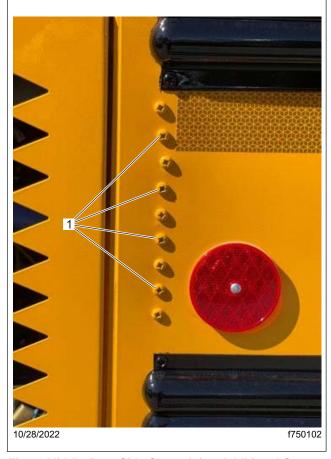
, Top Rear Side Sheet Joint, Additional Screws
